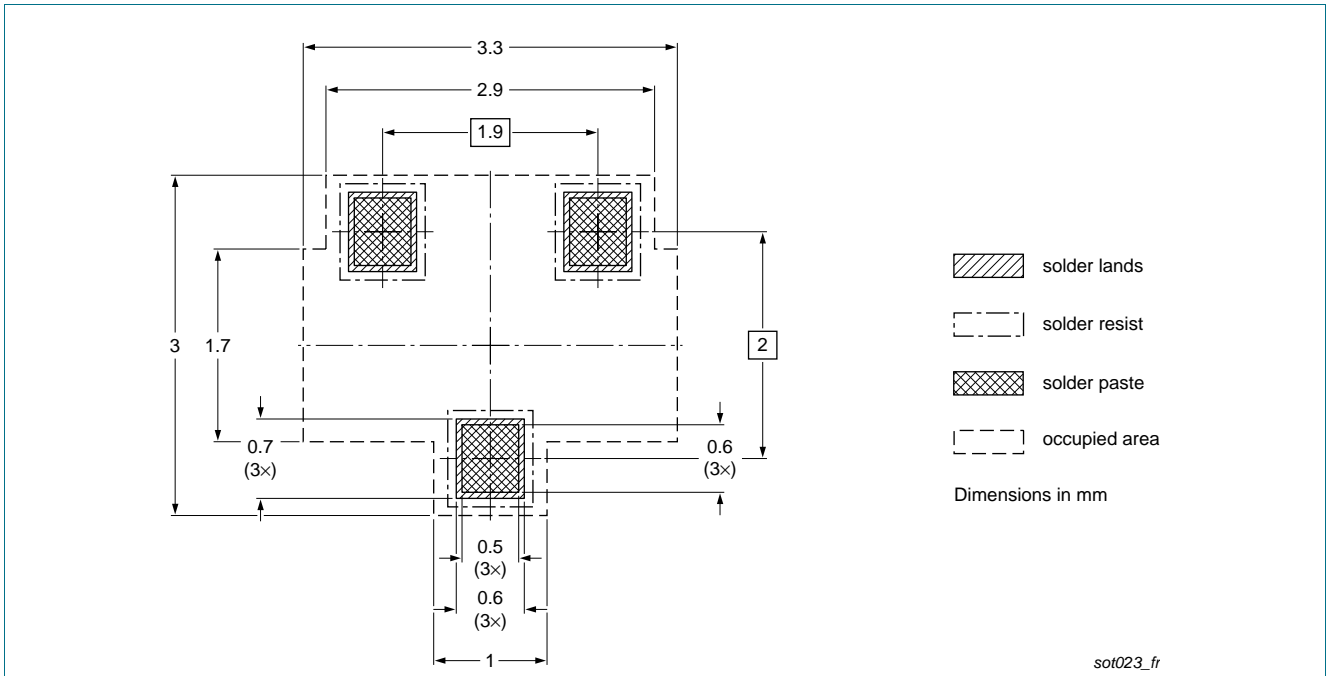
Reflow soldering footprint for SOT23 (TO-236AB)
